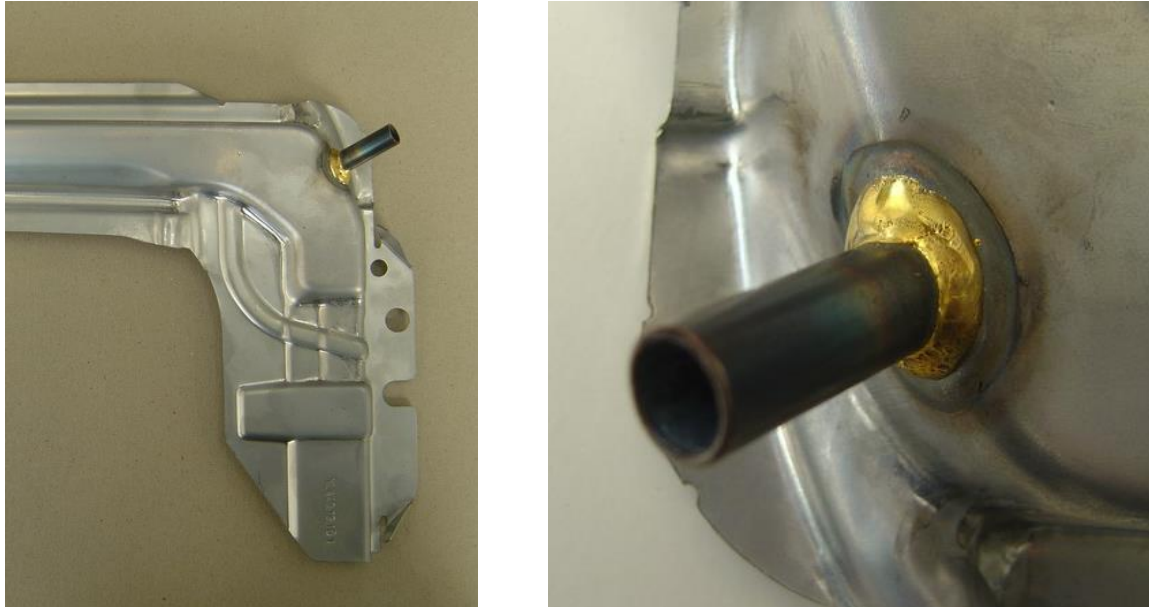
Left – view of roof window car component, right – the close-up of MIG CMT brazed joint
